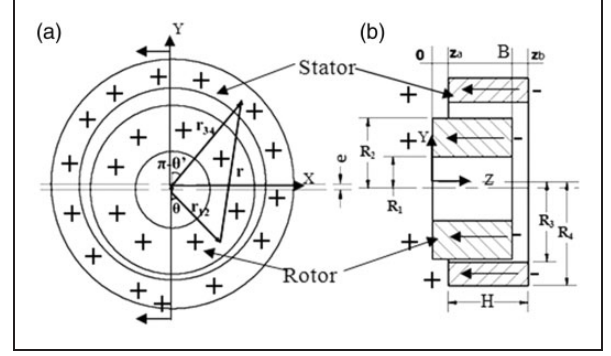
Configuration 1: coordinates of single-layer magnetic bearing: (a) front view, (b) sectional side view.
